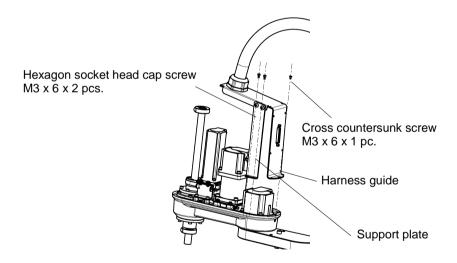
Dismounting harness guide and support plate (KHL-300, KHL-400)
